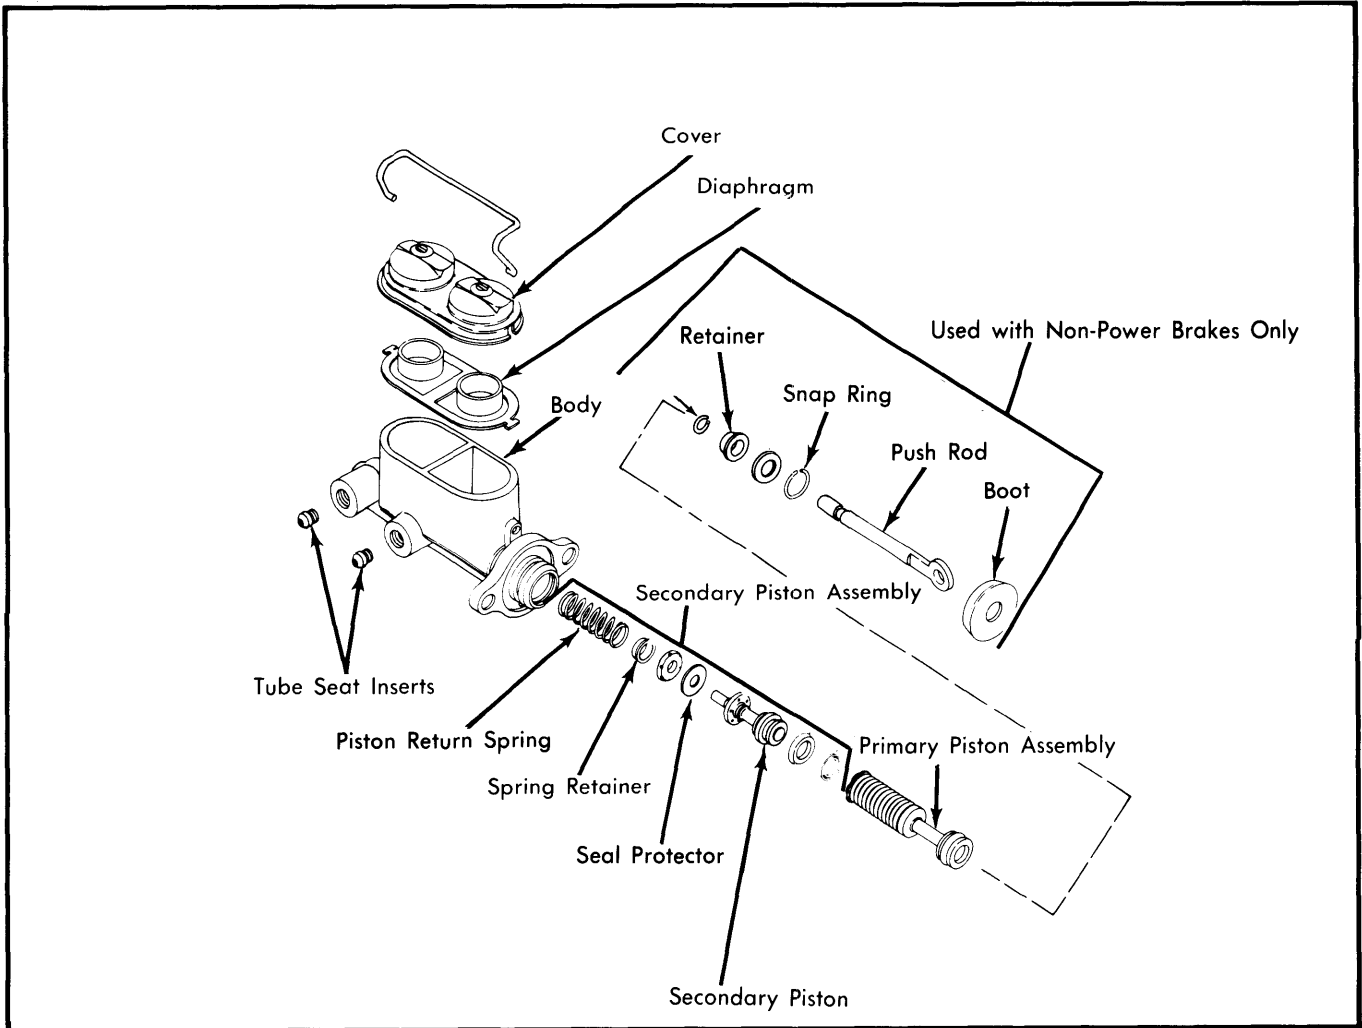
Exploded View of Typical Delco-Moraine Master Cylinder (Bendix Similar)
